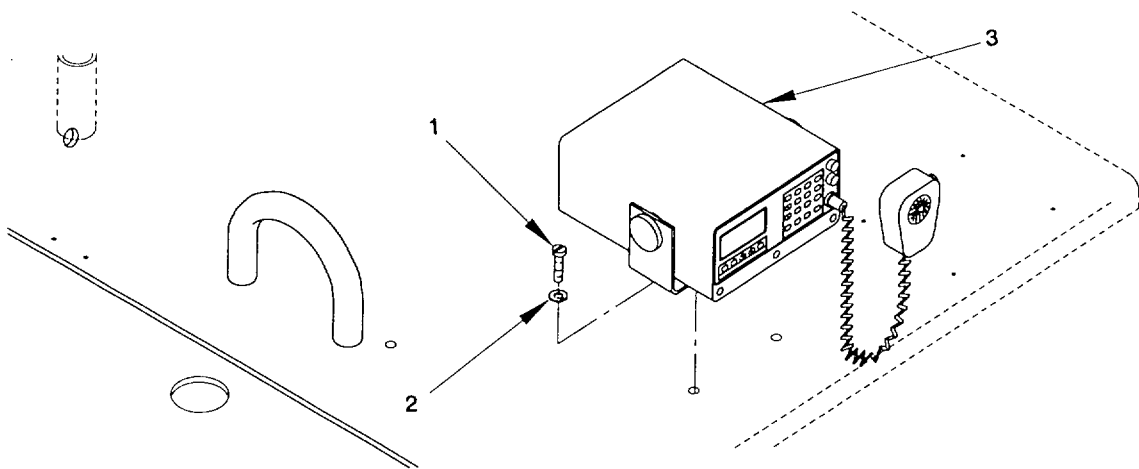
Receiver/Transmitter (VHF-FM), Remove/Install
